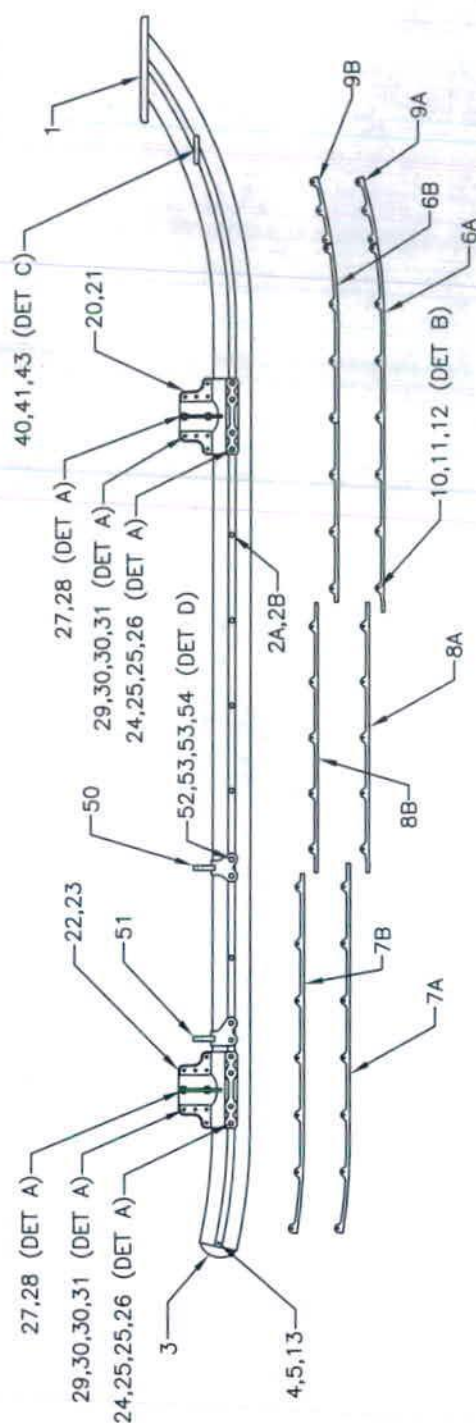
D204-635-011 SKIDTUBE INSTALLATION
